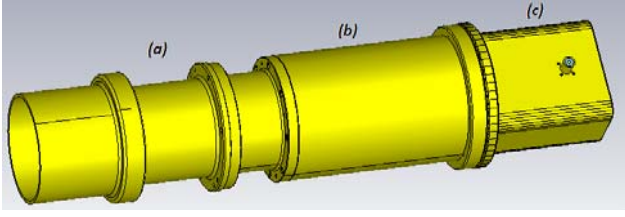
3D CST model of the modified front-end: (a) circular feed horn, (b) rectangular-to-circular adapter, (c) waveguide-to-coaxial cable adapter.
